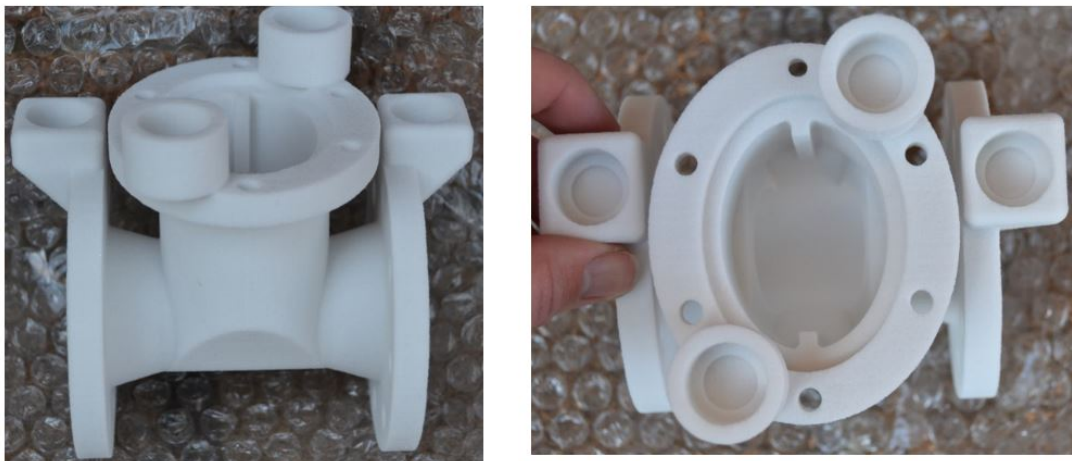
The additive manufactured PMMA valve body pattern showing the feeding system mounting points and surface finish of the material
